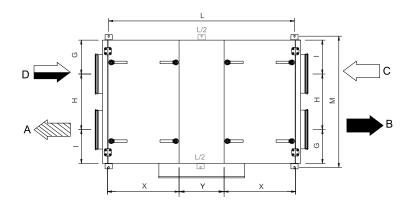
Dimensions (mm) Topvex FR03-11 (drawn as a left hand unit)
